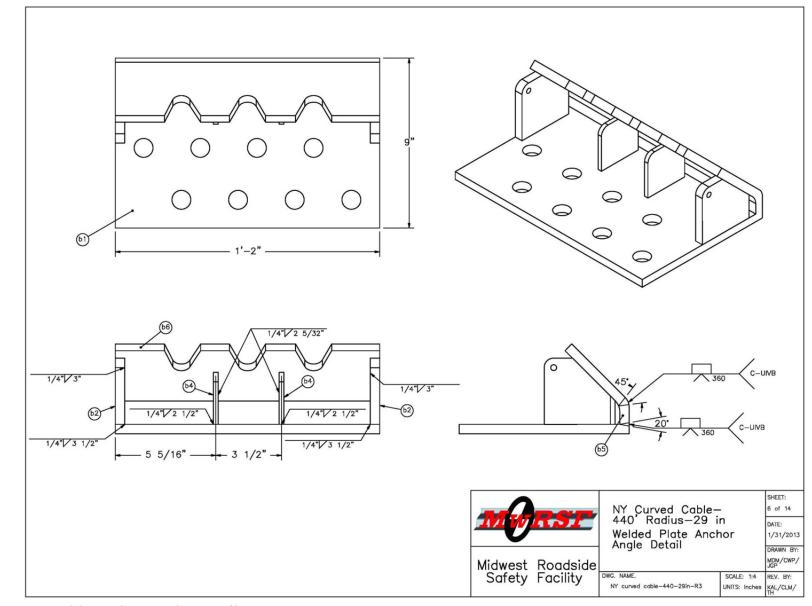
Cable Anchor Bracket Details, Test No. NYCC-3
